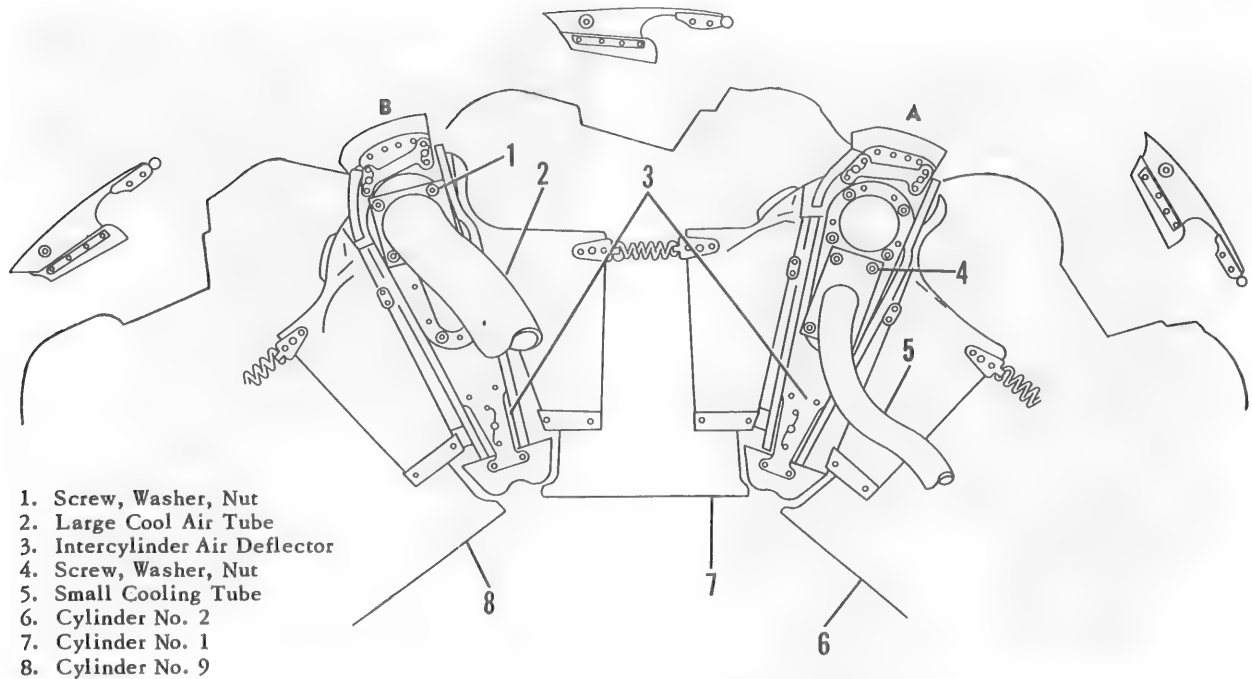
Typical Installation of Accessory Compartment and Engine Mount Cooling Tubes
